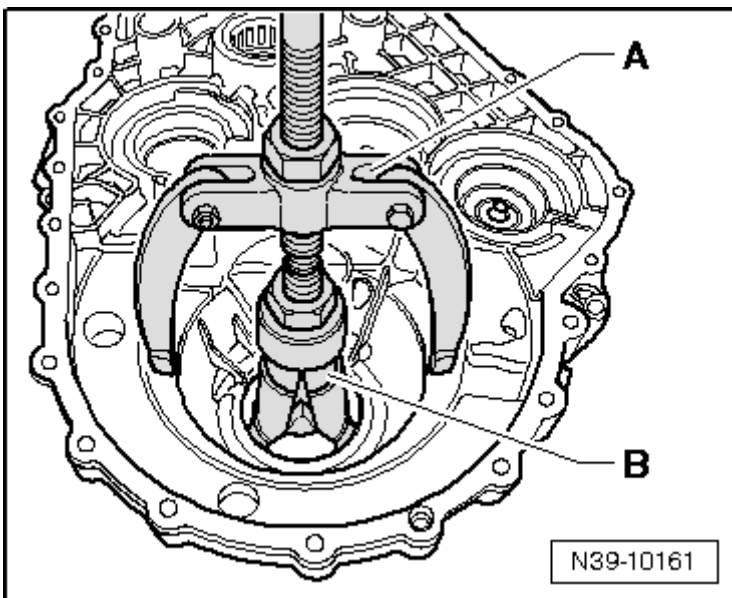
Removing Outer Race/Tapered Roller Bearing From Clutch Housing
